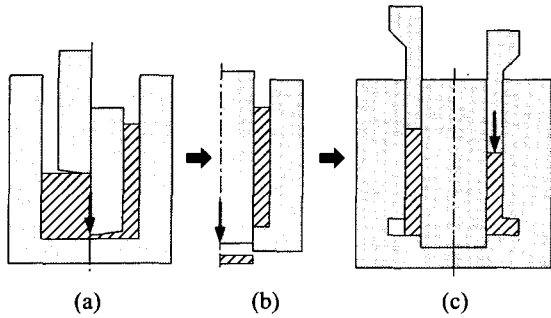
Forming process of a hollow T-shaped part using a hollow initial billet (method-4), (a) backward extruding, (b) piercing, and (c) injection forging process
